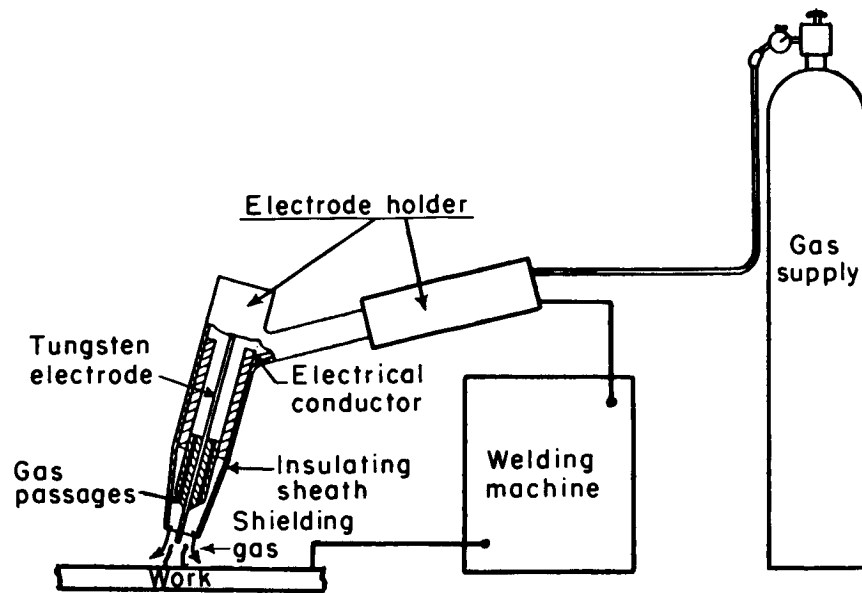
GAS-TUNGSTEN-ARC-WELDING PROCESS (REF. 38)
